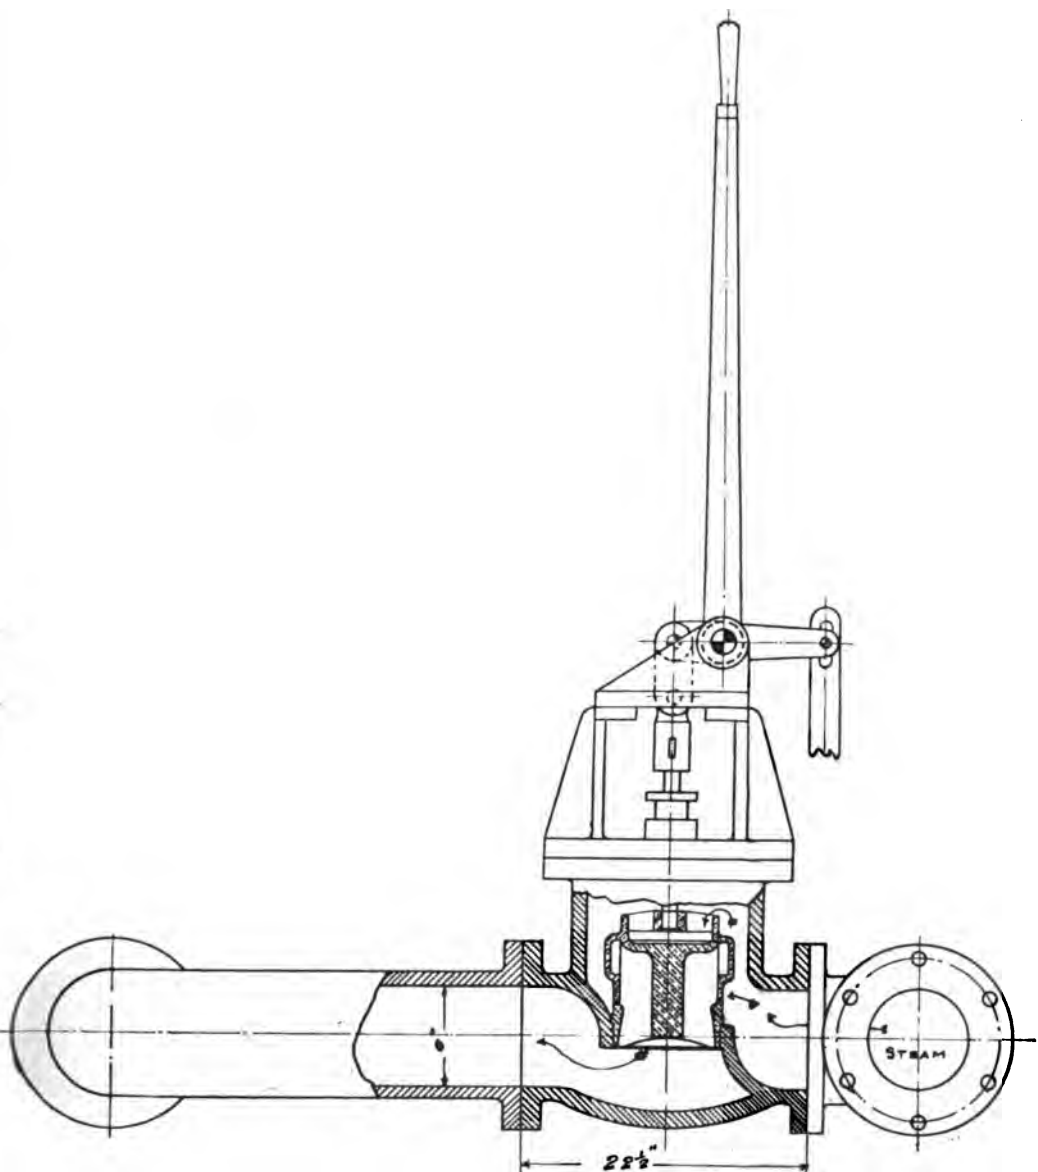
A CORNISH-TYPE STEAM THROTTLE VALVE FOR WINDING ENGINES.
